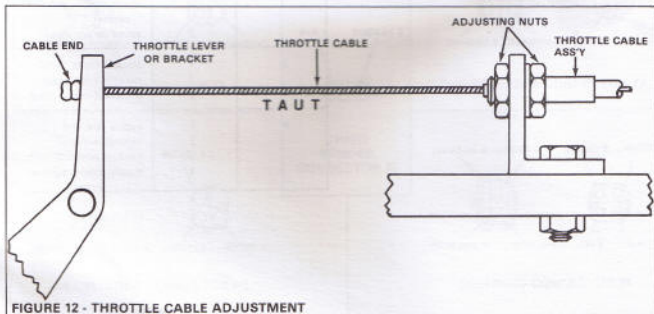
THROTTLE CABLE ADJUSTMENT
